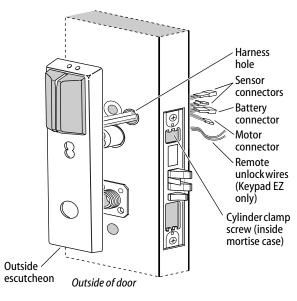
Feeding the wire harness connectors through the harness hole (B.A.S.I.S. Lock shown)
